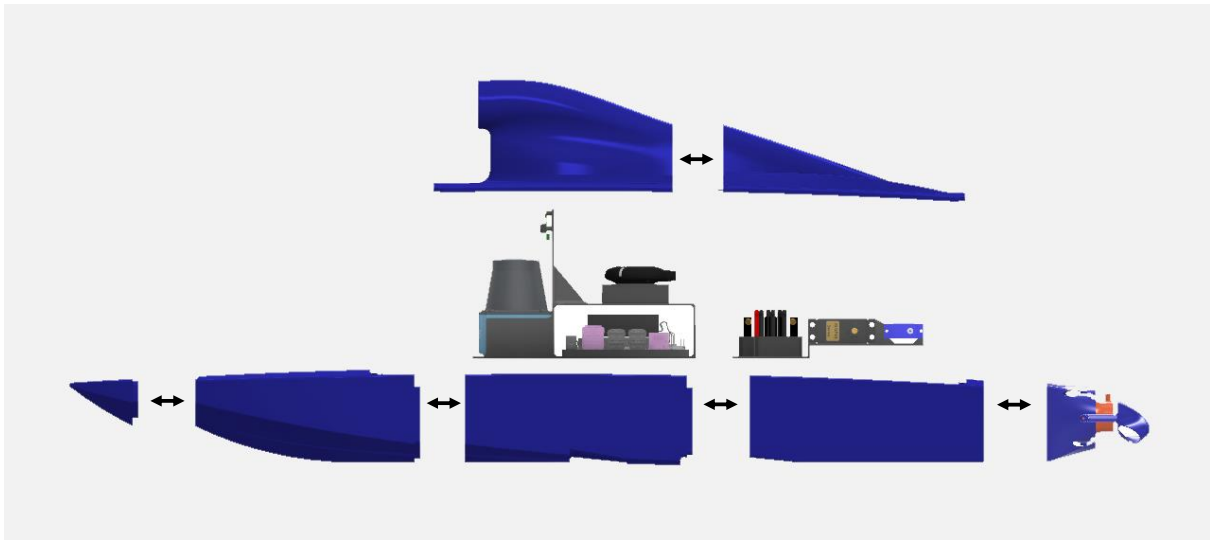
The platform's hull is printed in 6 core sections that fit independently on a standard bed size of a FDM printer such as the Prusa Mk2 I3.
